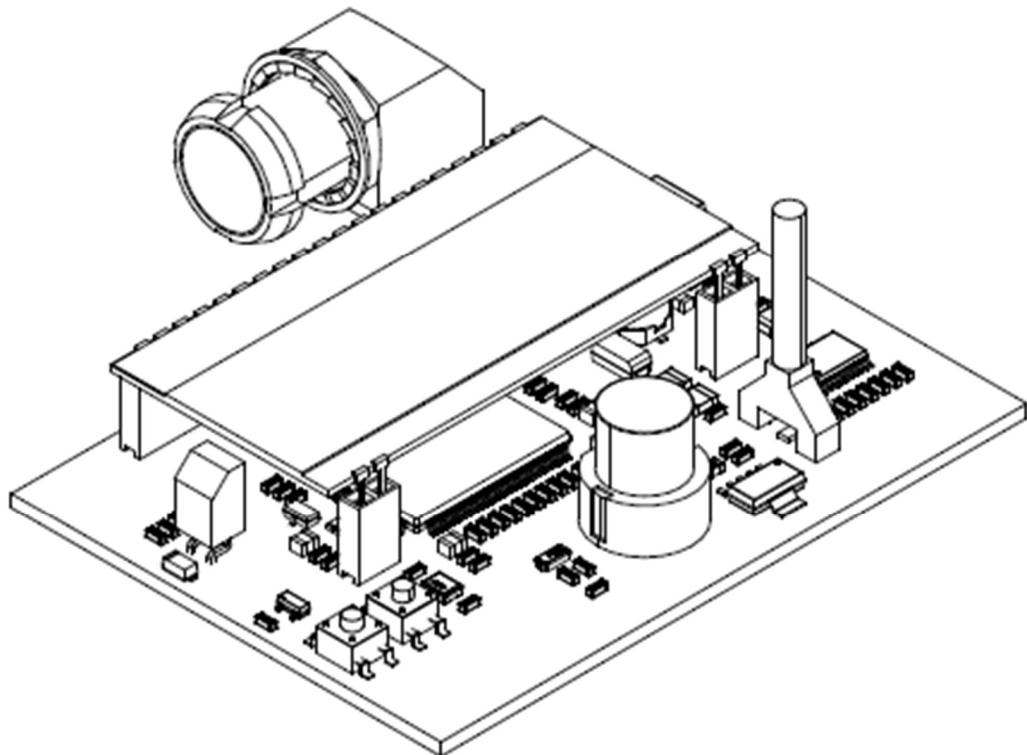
MACK Sony Camera Control System Sender PCB Top Isometric View
